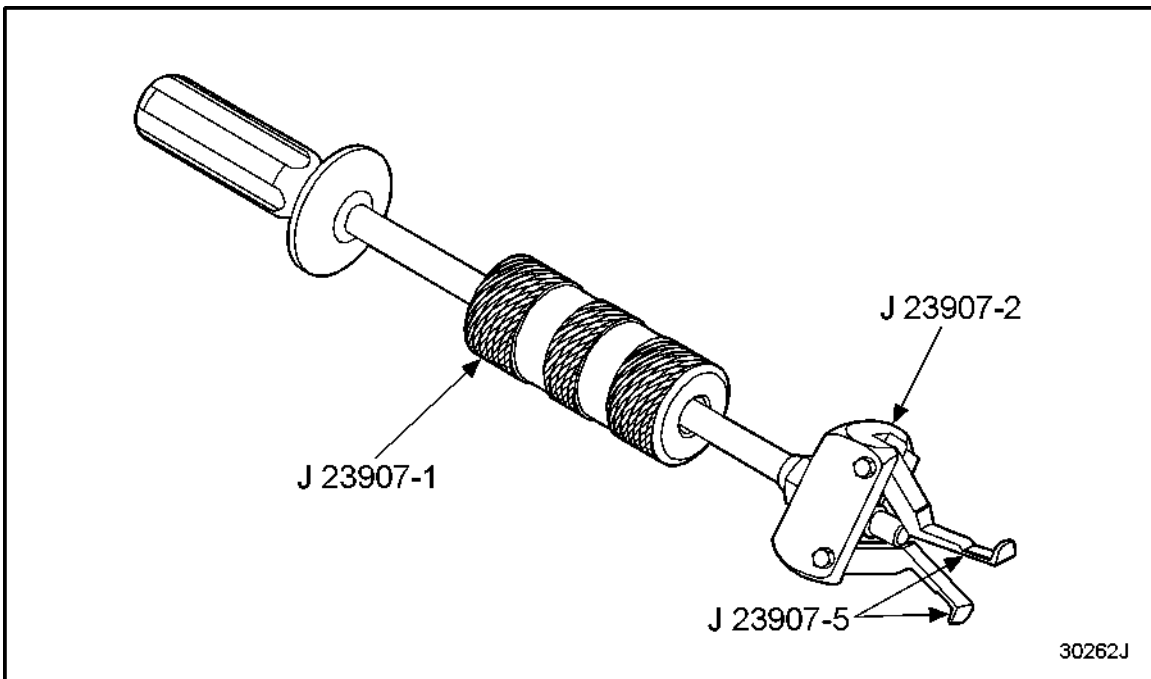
Clutch Pilot Bearing Remover J 23907-2
